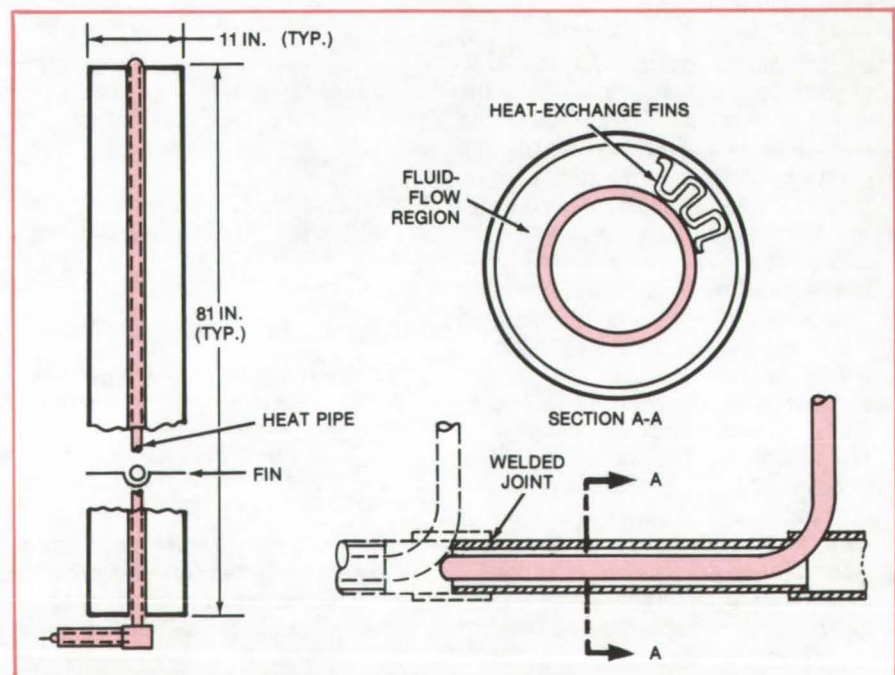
Heat-Pipe Submodule (Left) and Fluid-Header Joint (Right) are shown in detail.
